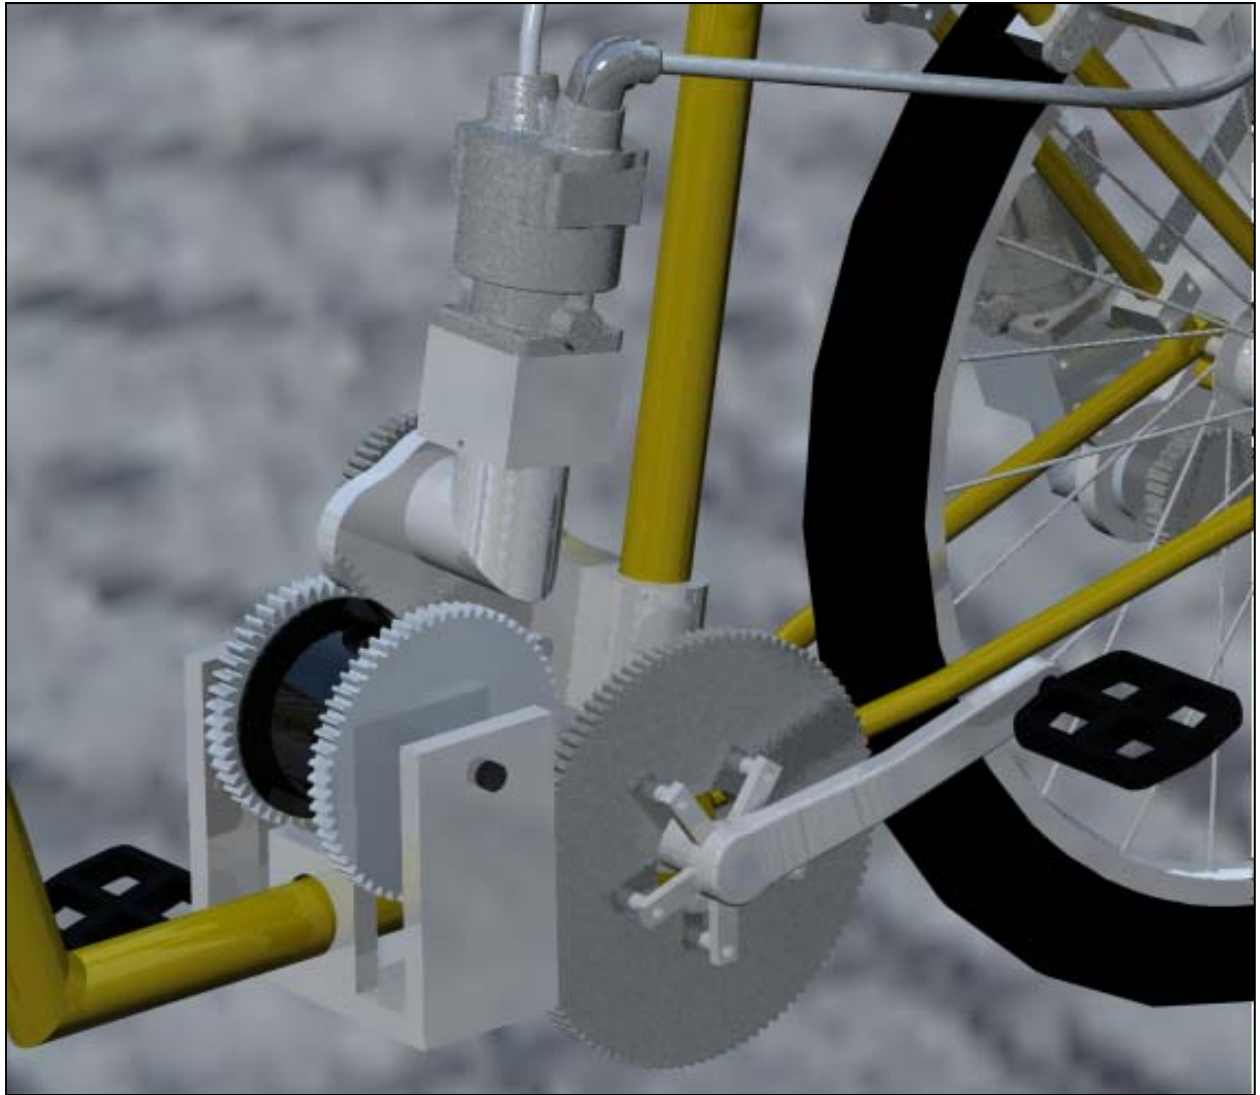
CAD rendering of the front hub, pump, and gear train subassembly
